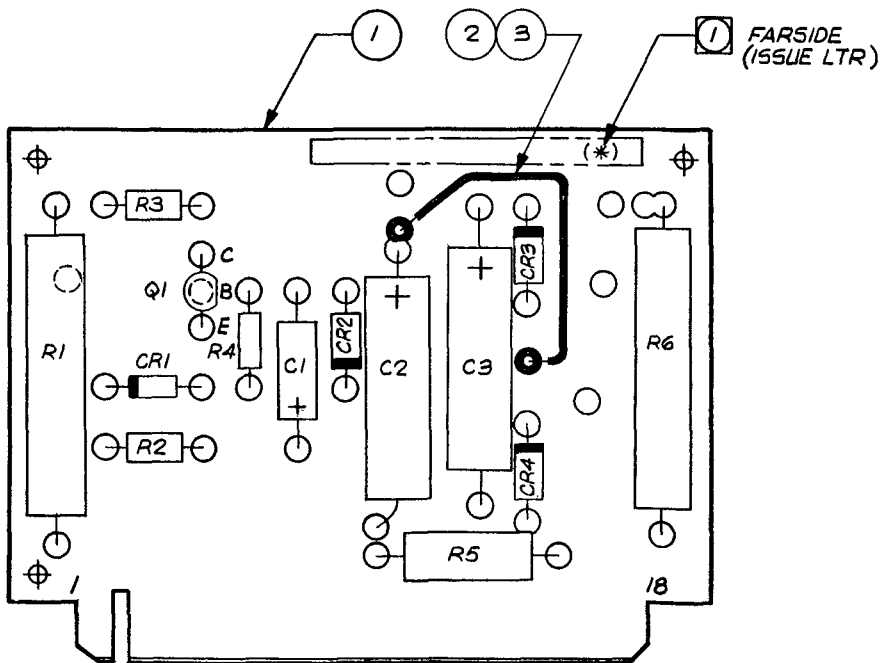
; Schematic, Head Interlock PC Board C105-091 with Photo and Component Layout D124-208
